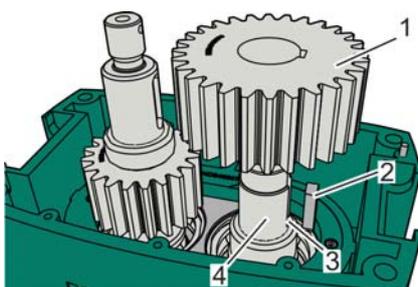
Sliding the toothed wheel onto the cutter block shaft, example
